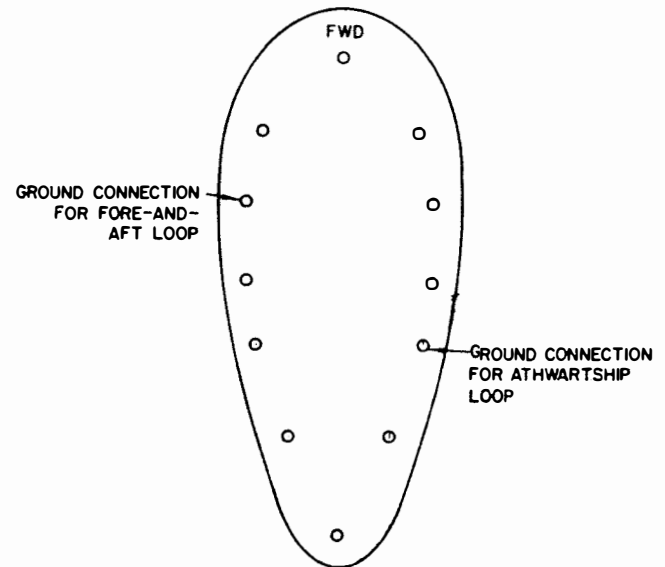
Bottom view of joint between antenna subassembly & mounting base of AT-317/BRR.
